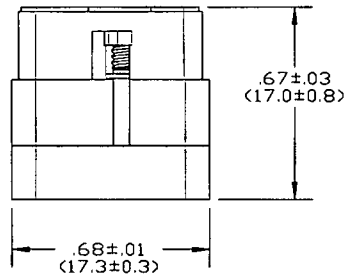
MIL-C-39029/22-192 Receptacle Assembly
